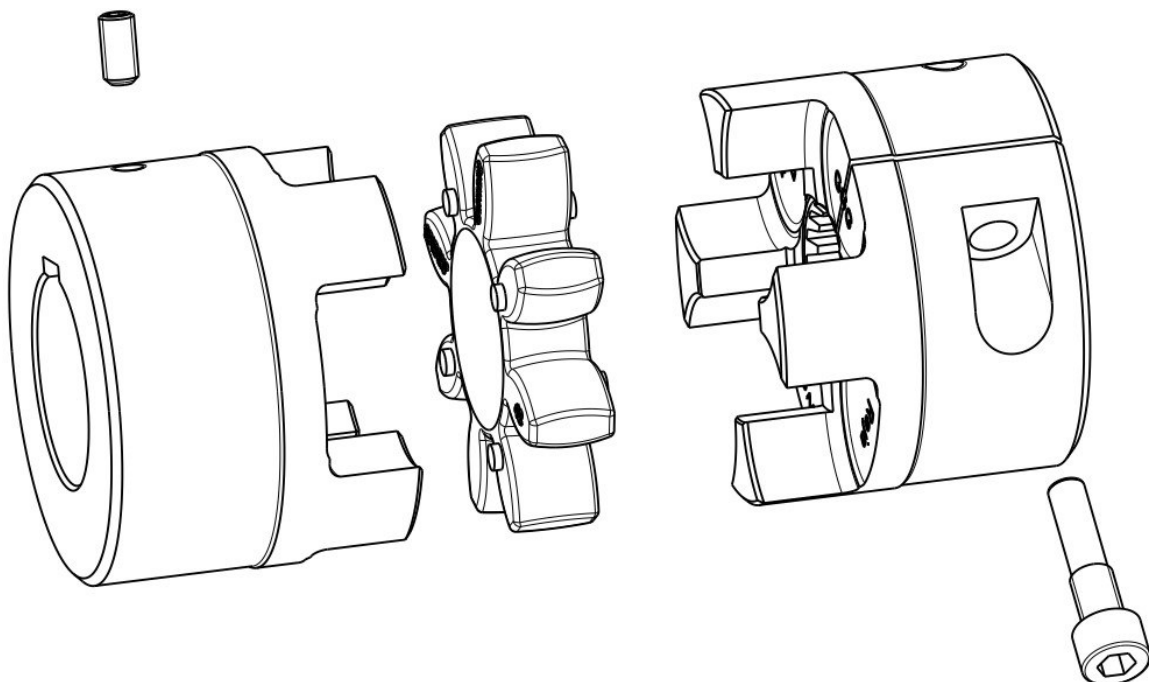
SPIDEX® jaw coupling with clamping version – assembly
